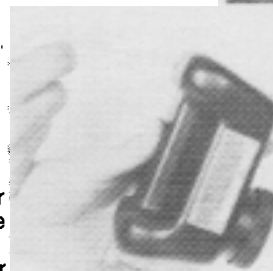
Step 2: Wiggle and pull the fuel line as shown above until the fuel filter assembly is seated. Tank should now be ready for re-installation on trimming unit. Before operating engine, check for fuel leaks.
